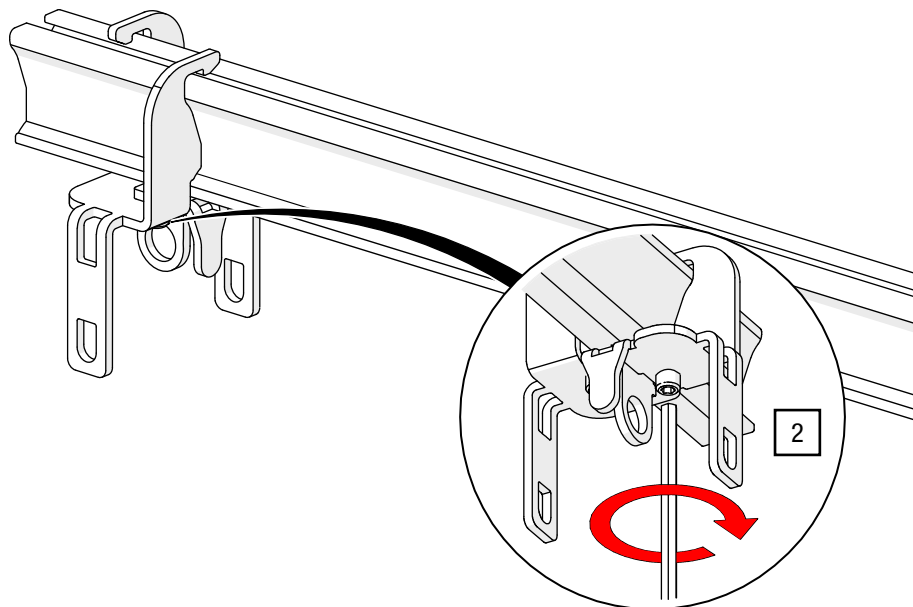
Variable end stop with curtain mounting – Tighten grub screw
